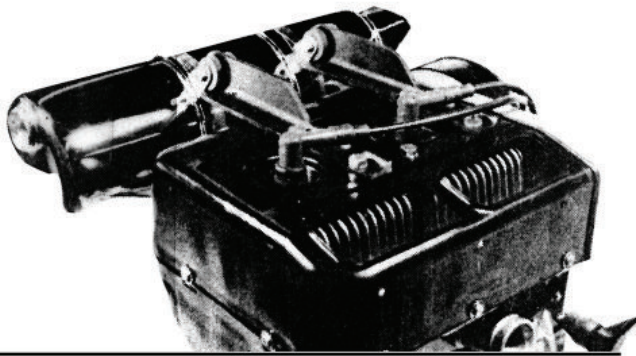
Shows an exhaust mounting system using the head studs cushioned by rubber bushings to absorb vibration and extend service life of muffler.
